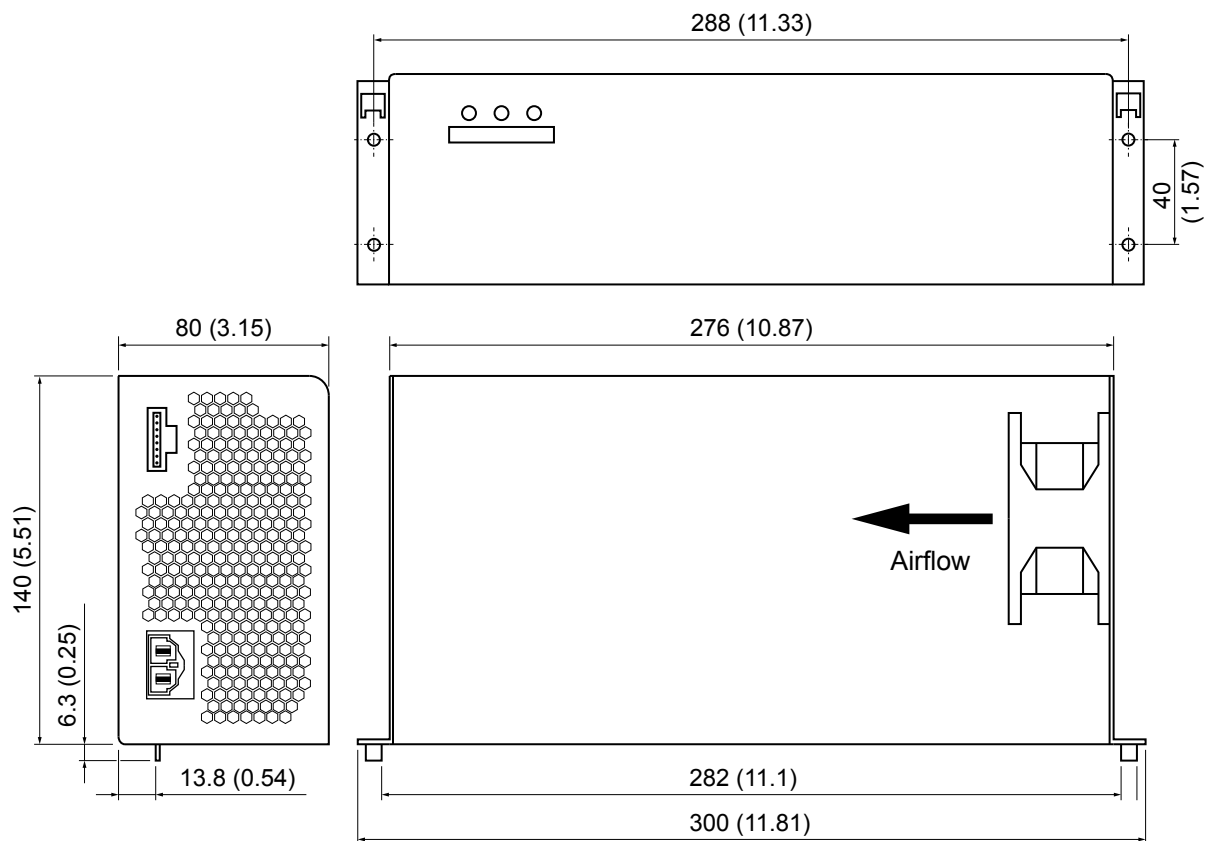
Dimensional drawing, Dimensions in mm (inch)
